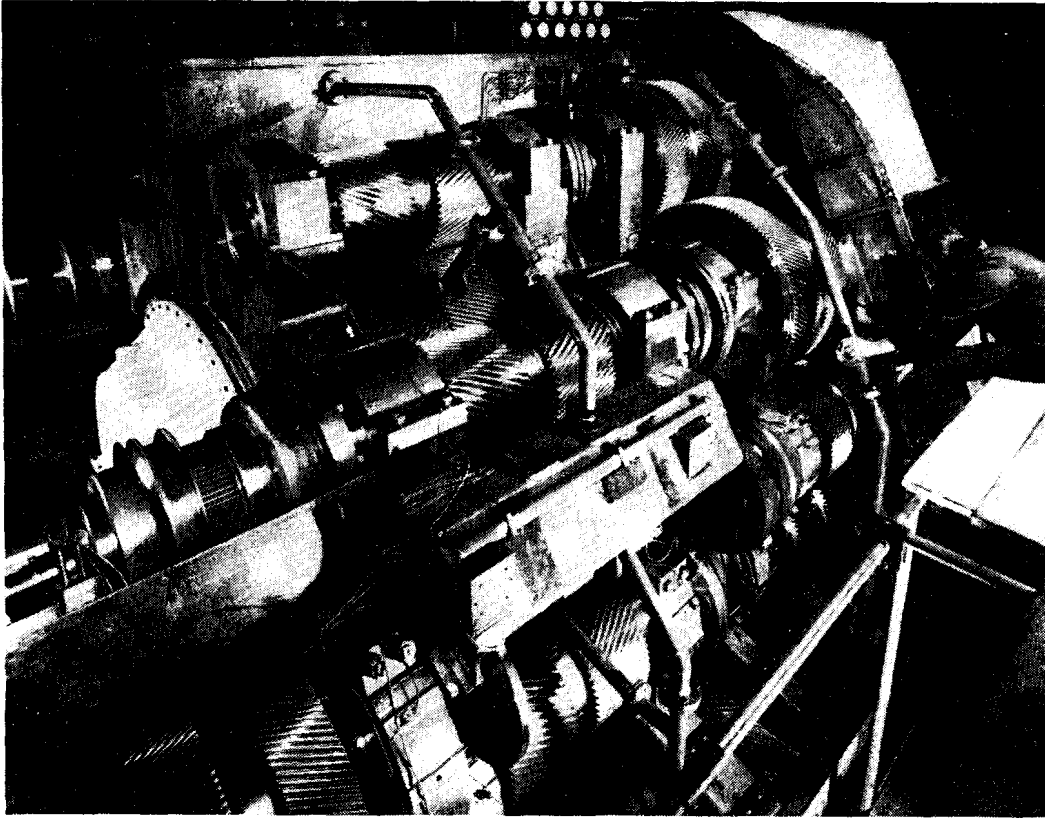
CAH GEARS VIEWED FROM FORWARD, SHOWING PRIMARY WHEEL LOWER LEFT, FINAL DRIVE PINIONS CENTRE, AND INTERMEDIATE GEARS RIGHT
